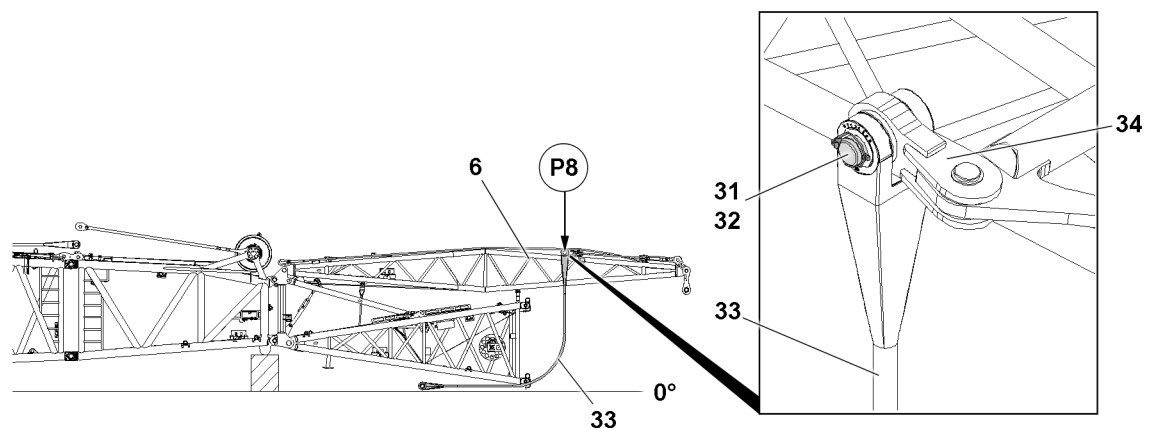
Assembling the FAB-guy rope on the rocker on the FA-frame
